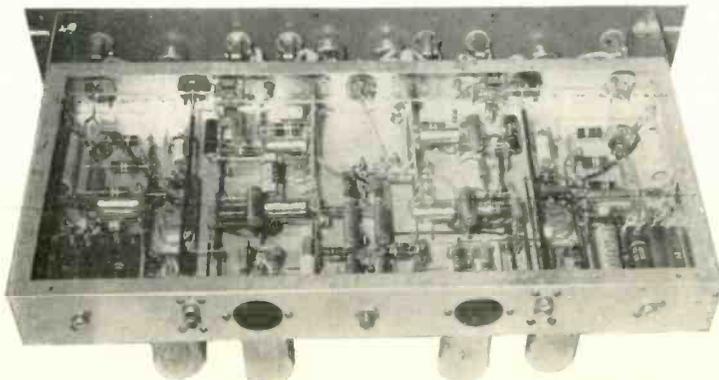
Bottom of Record/playback amplifier showing component layout.
